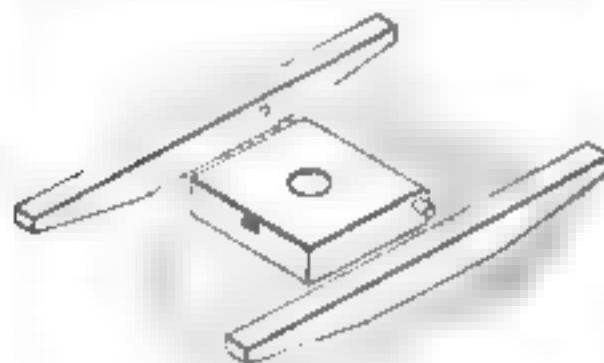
The three parts which are necessary to mount the table if the top is to tilt
